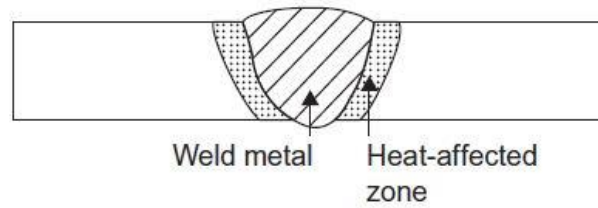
Section of welded joints (Ueda and et al., 2012)
